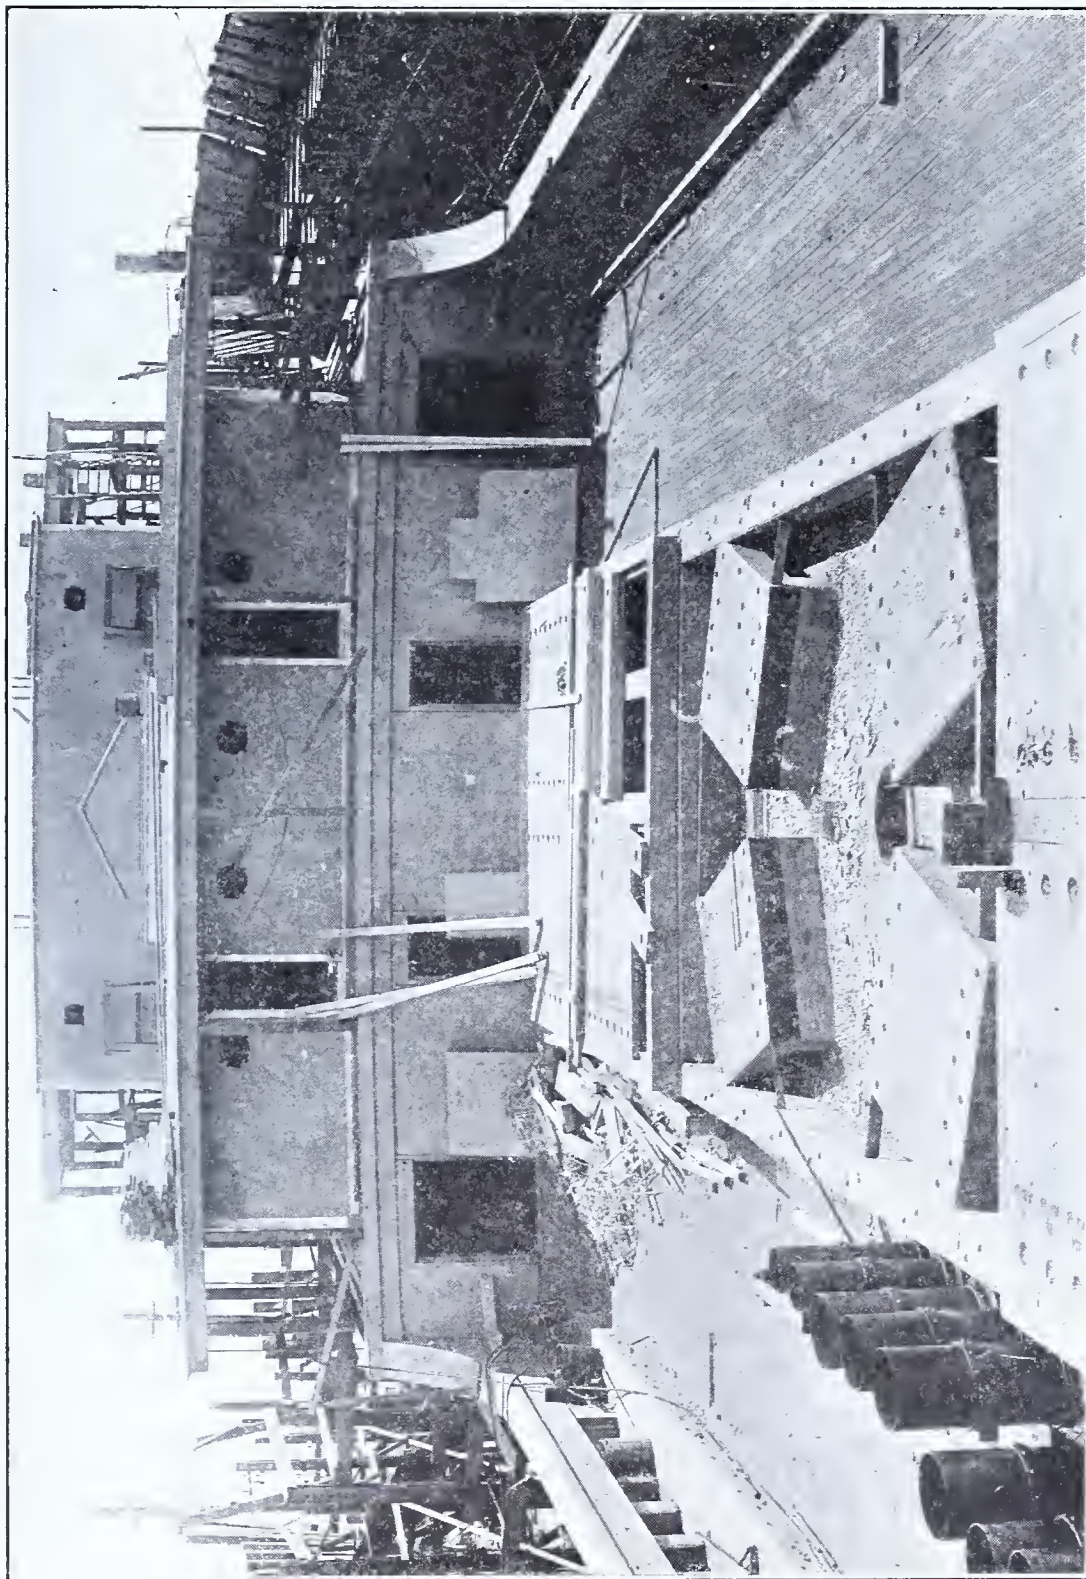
Main or upper deck looking aft showing bridge, bridge deck house, boat deck house, bulwarks, hatch coamings and covers, hatchways, winch foundations and ventilator throats.
